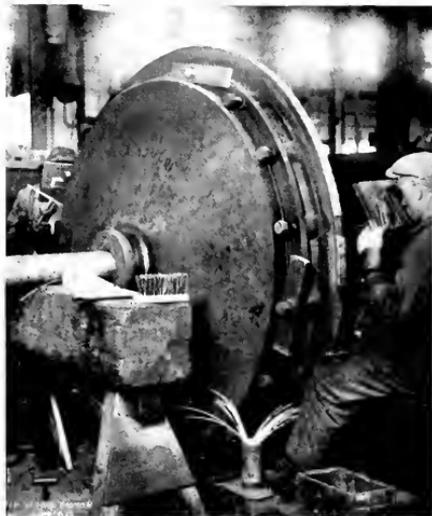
Building up a Large Low-pressure Piston by Electric Arc Welding
